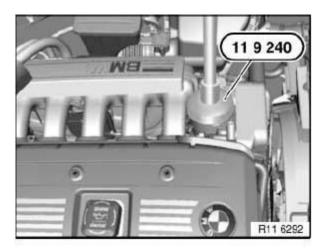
Removing Oil Filter Cap With Special Tool Courtesy of BMW OF NORTH AMERICA, INC.
